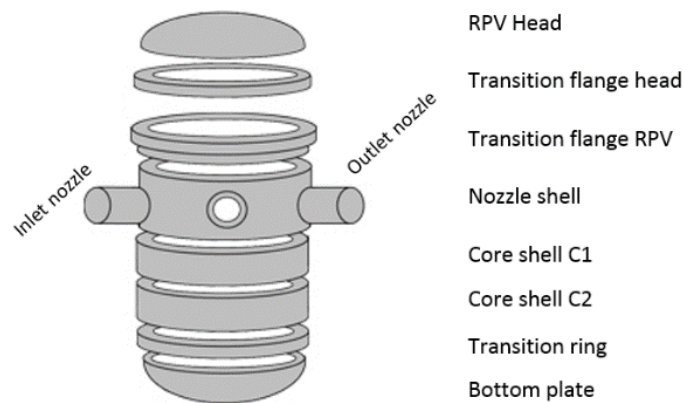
Illustration translated from FANC, showing the original forged steel ring sections of the RPV separated for clarity. These rings are welded together and clad internally with a stainless steel lining to form the reactor pressure vessel.
